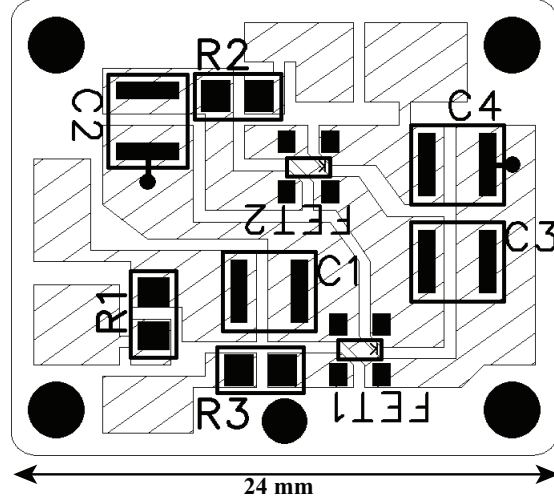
Component layout on the preamplifier circuit board located inside the preamplifier housing box. Striped areas represent the conducting gold plated copper areas. Outlines and connecting pads of parts are marked in black. Big black circles are holes for the fixing screws and for the wire input.
